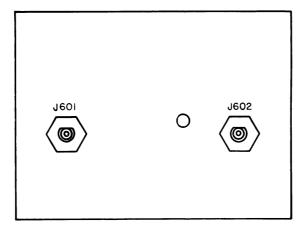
HIGH-LOW PASS FILTER PC BOARD ASSEMBLY
